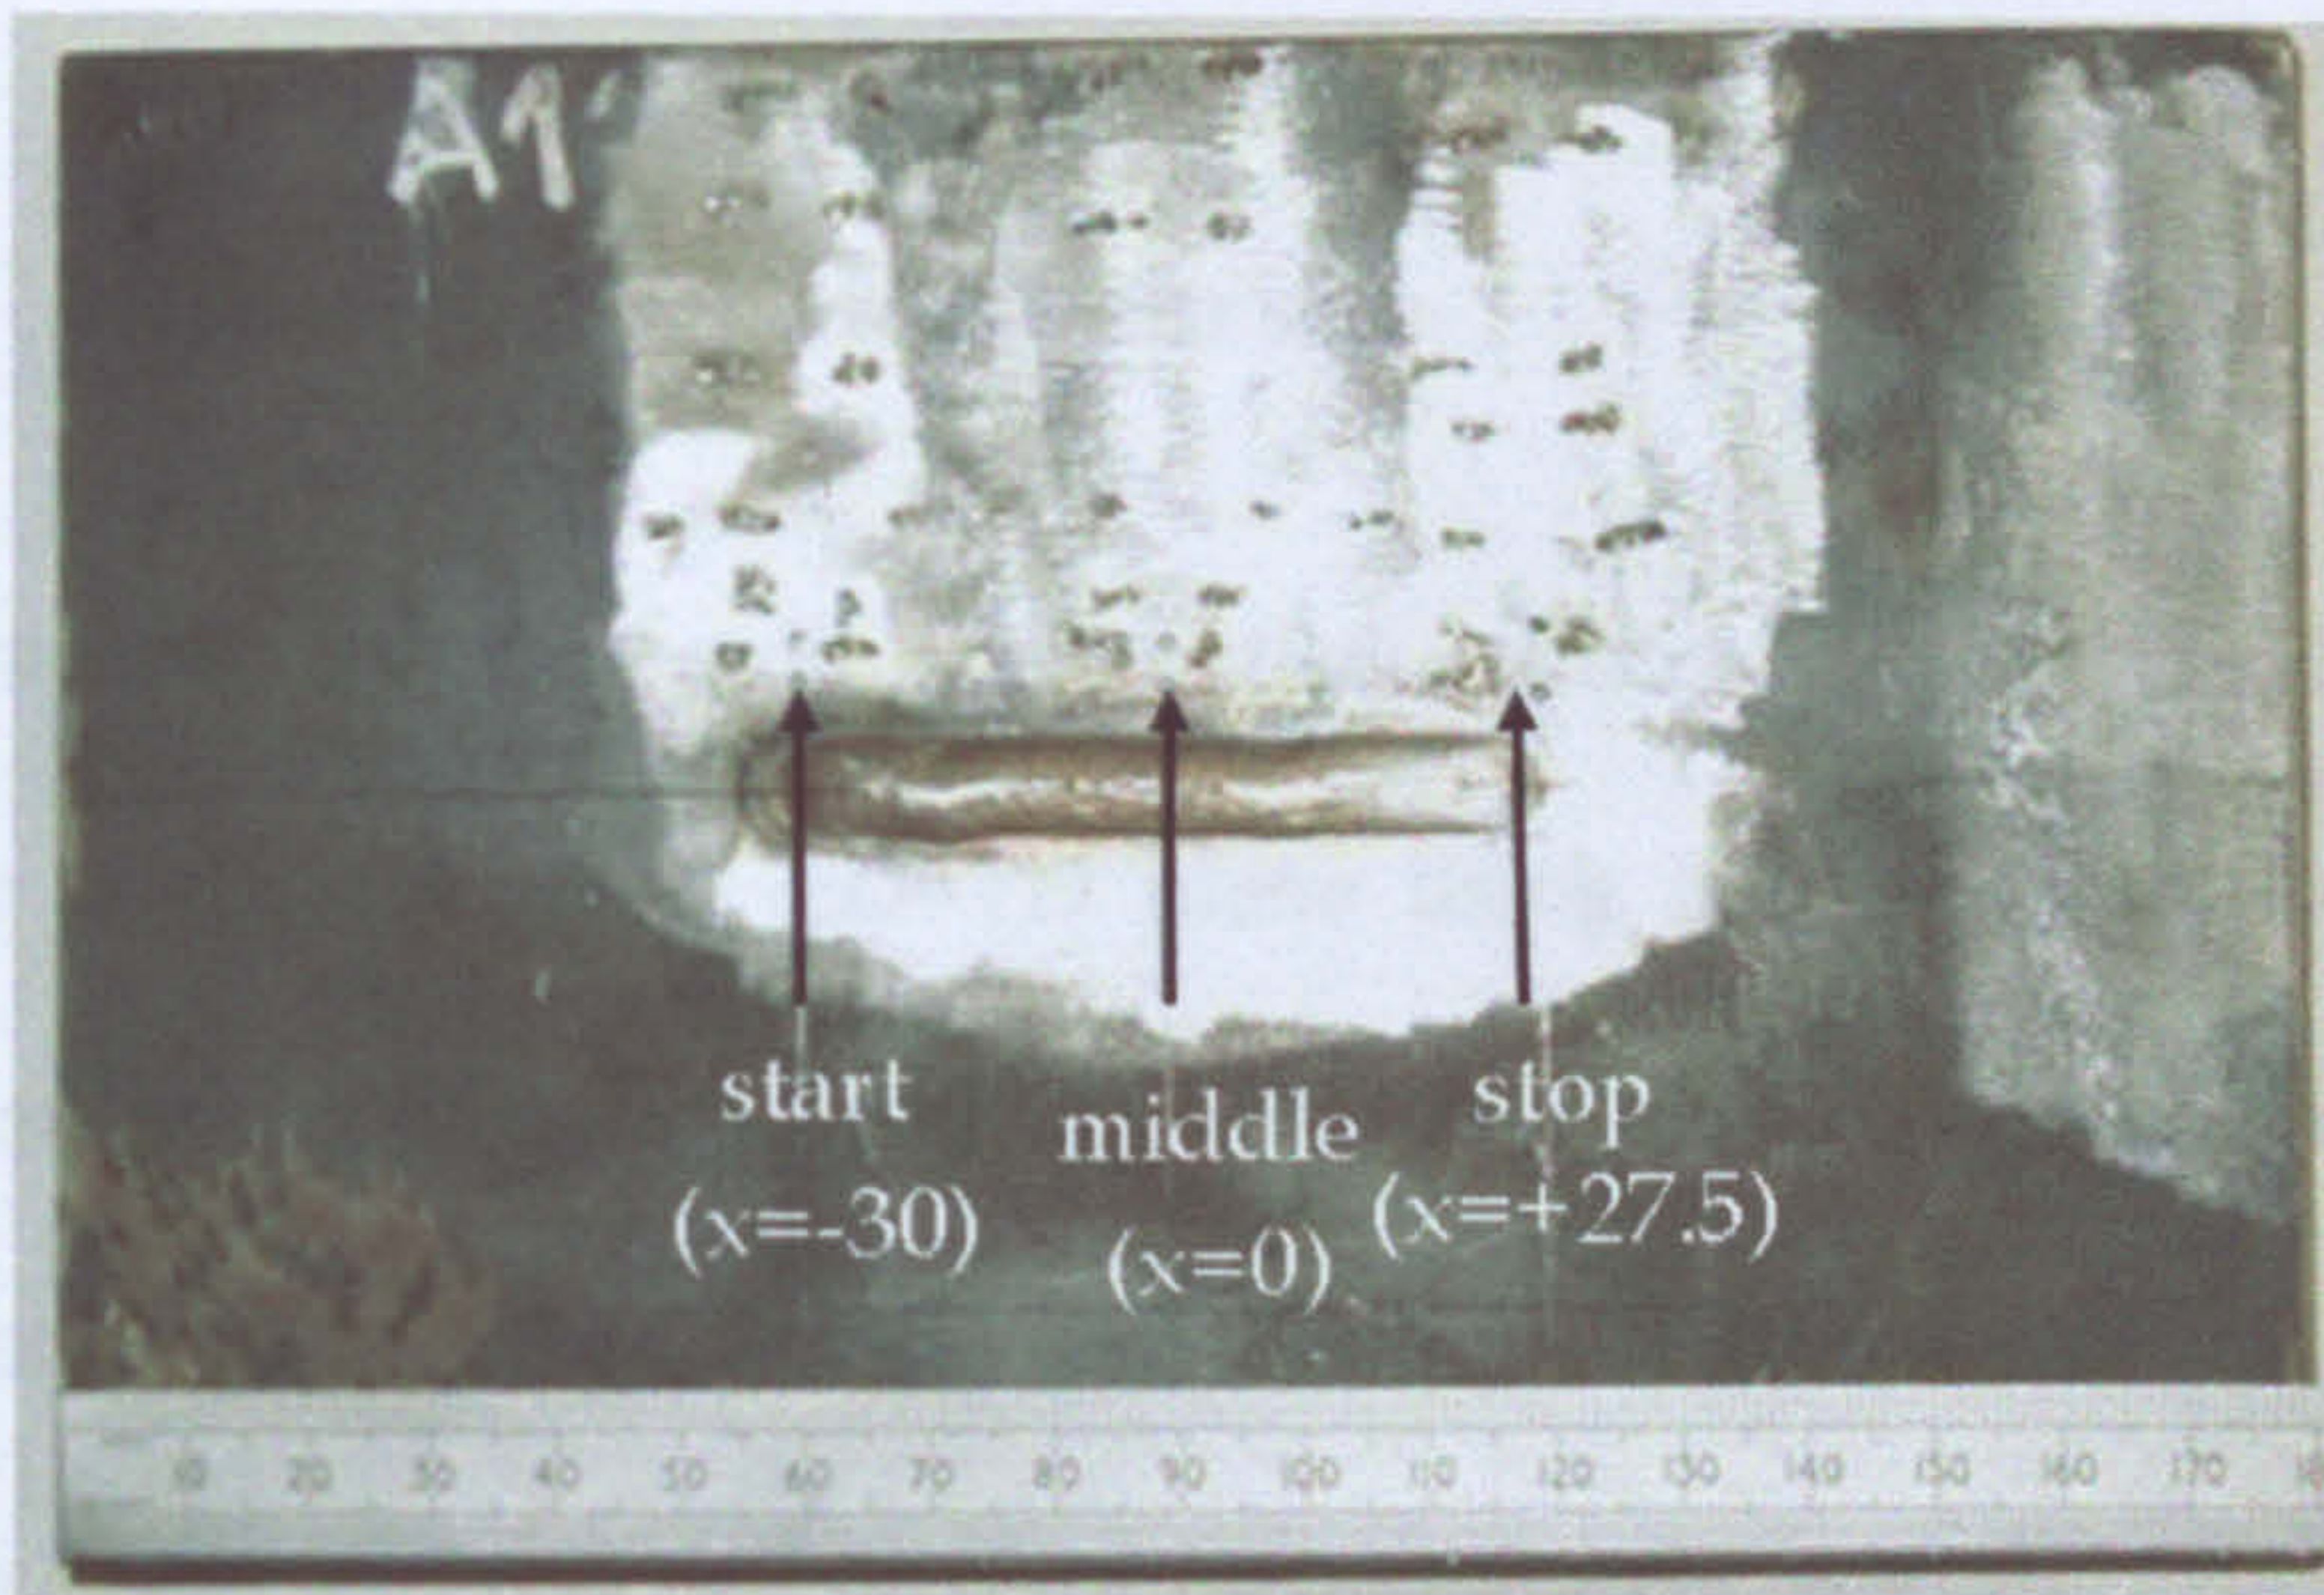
Photograph of bead-on-plate weld.
